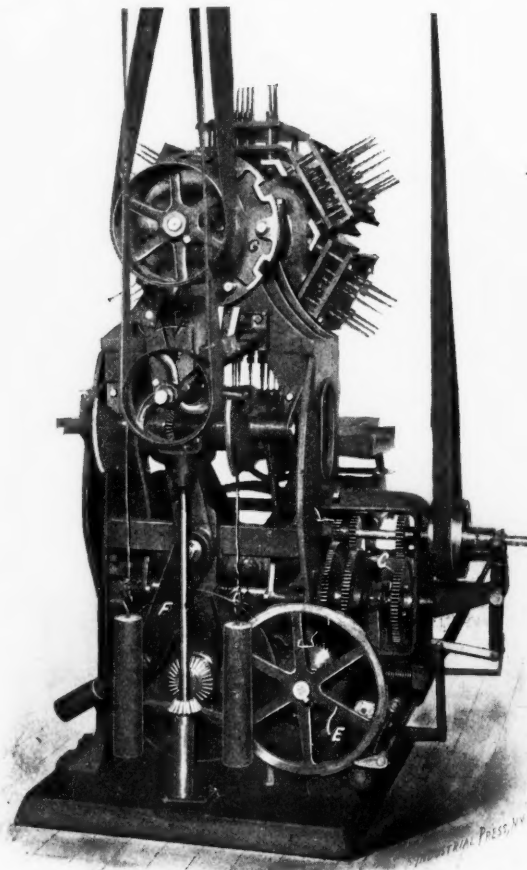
Rear View of Drill Press showing Operating Mechanism.
